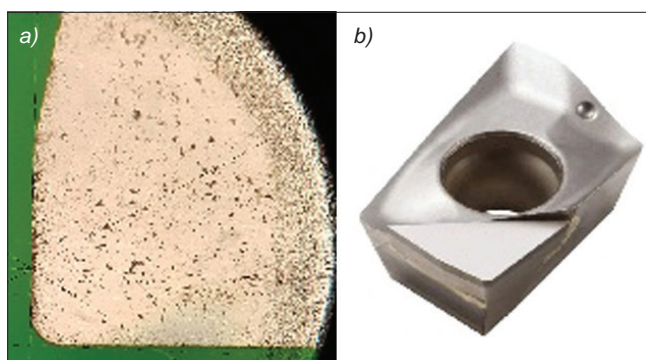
PCD05 cutting insert: a) microscopic view of the insert corner, b) insert visualization [13]
